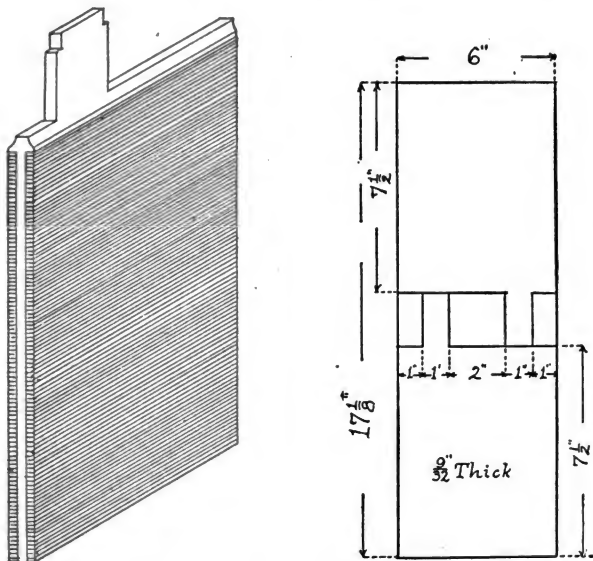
Grooved Lead Slab for Planté Formed Plate.
